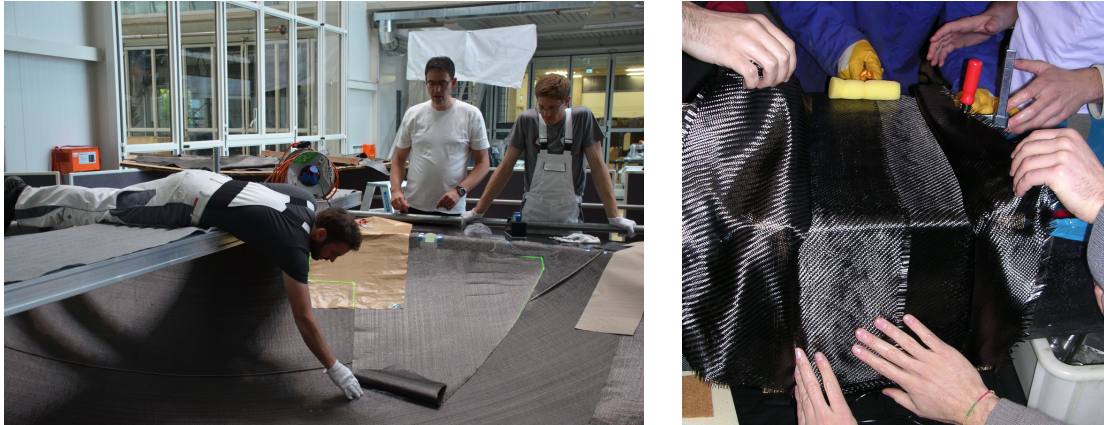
Manual hand layup of a carbon fabric layer onto a mold using laser projection (left), required tools during hand layup (right).
